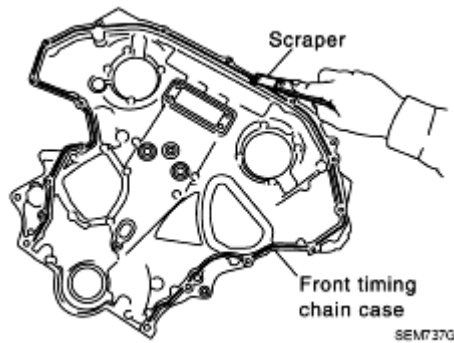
Removing All Traces Of Old Liquid Gasket From Front And Rear Timing Chain Cases And Oil Pan (Upper) And Liquid Gasket Mating Surfaces
